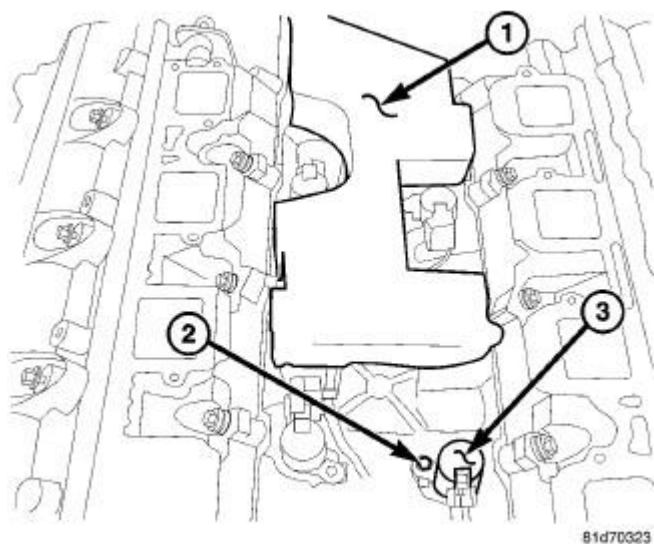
Identifying MDS Solenoid & Intake Manifold Foam Insulator Pad
